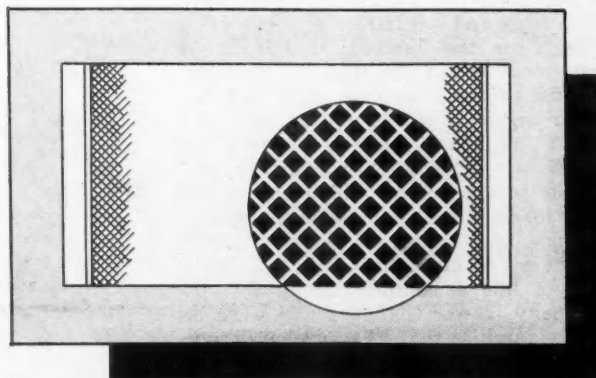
Plan view of grid bearing with enlarged view of grid pattern
